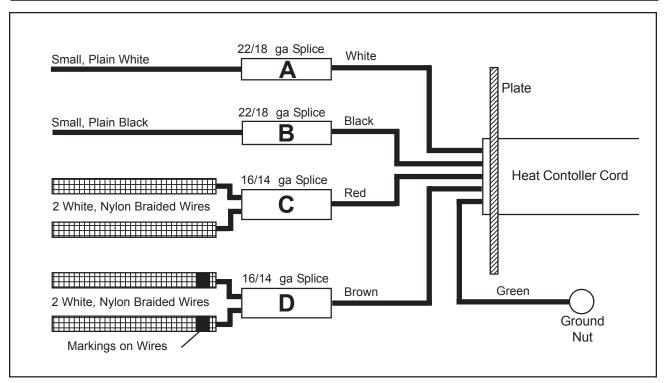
Wiring Diagram - Heat Controller Cord to Table
